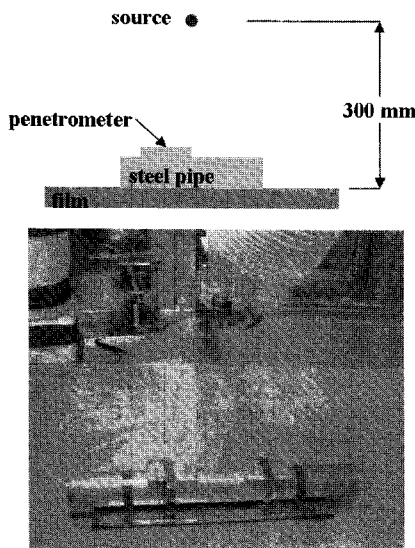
Schematic drawing and photography of NDT set up of welded steel tube
